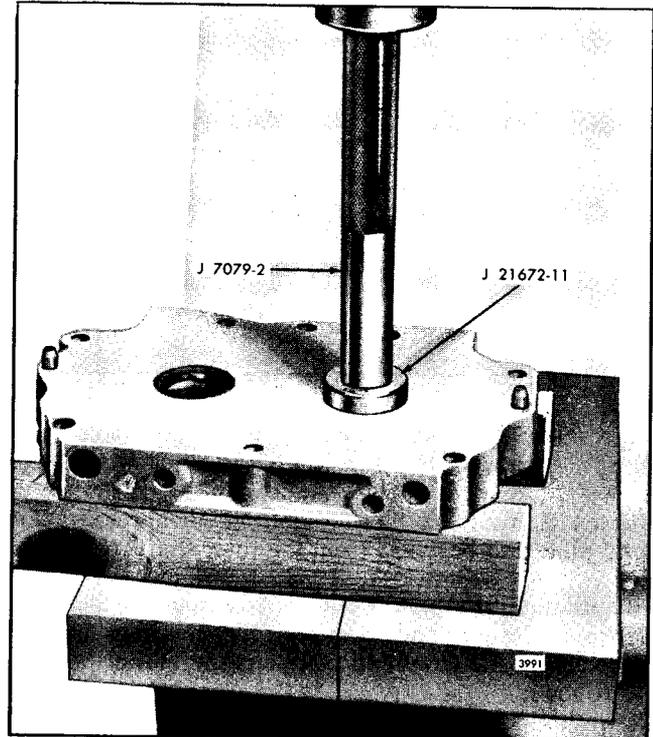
Removing Oil Seal and Roller Bearing from Rear End Plate (Former Blower)
